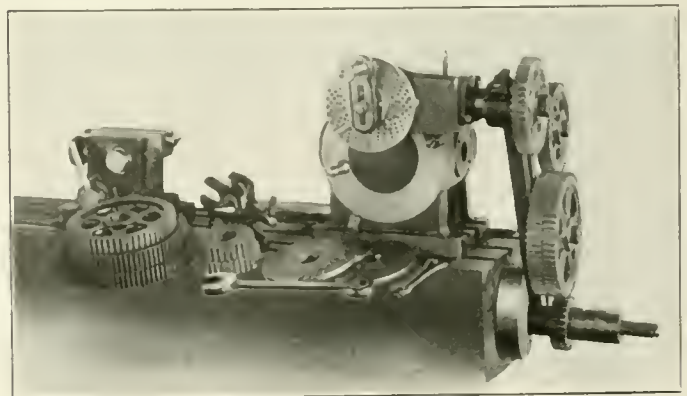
Universal Index Center With Spiral Cutting Attachment
